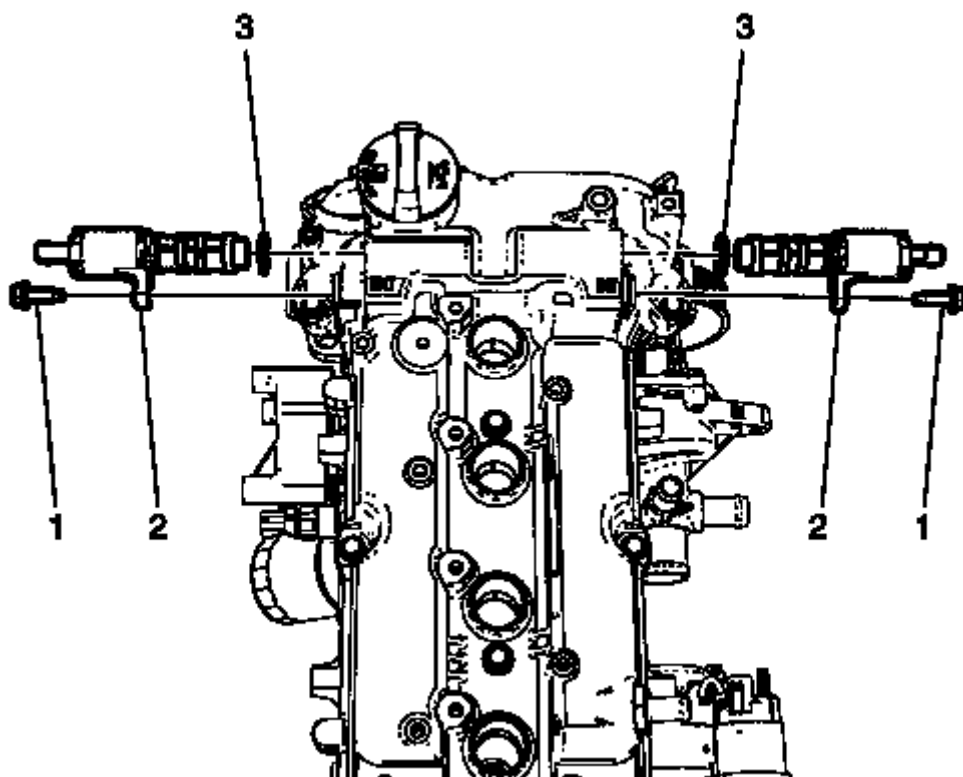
Camshaft Position Actuator Solenoid Valve Bolts
